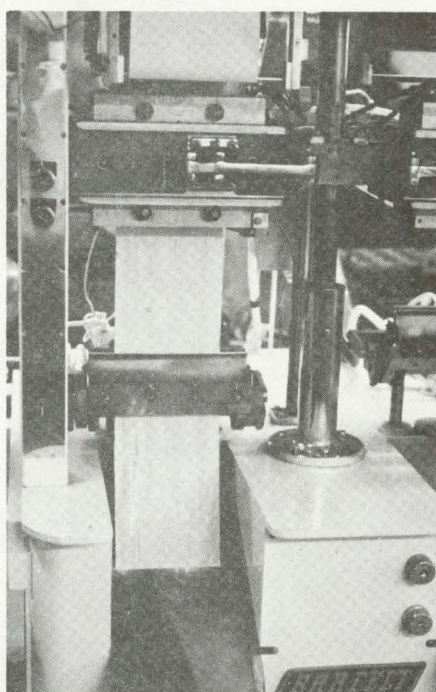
Multiple packaging machine used to manufacture  $\text{SO}_2$  release devices.
